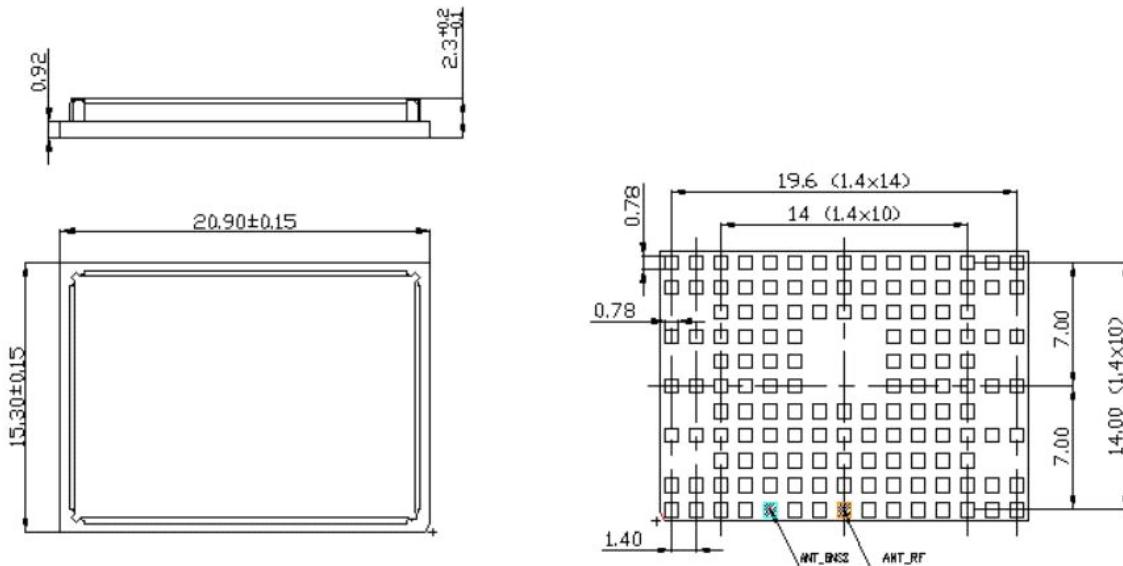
Dimensions of TX82-W and TX62-W-B (all dimensions in mm)
